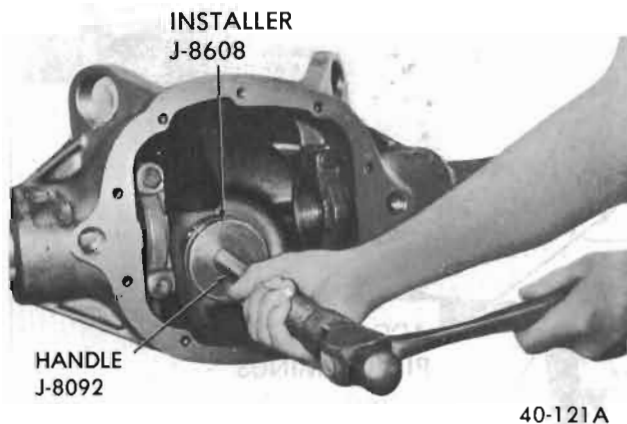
Installing Rear Pinion Bearing Outer Race
